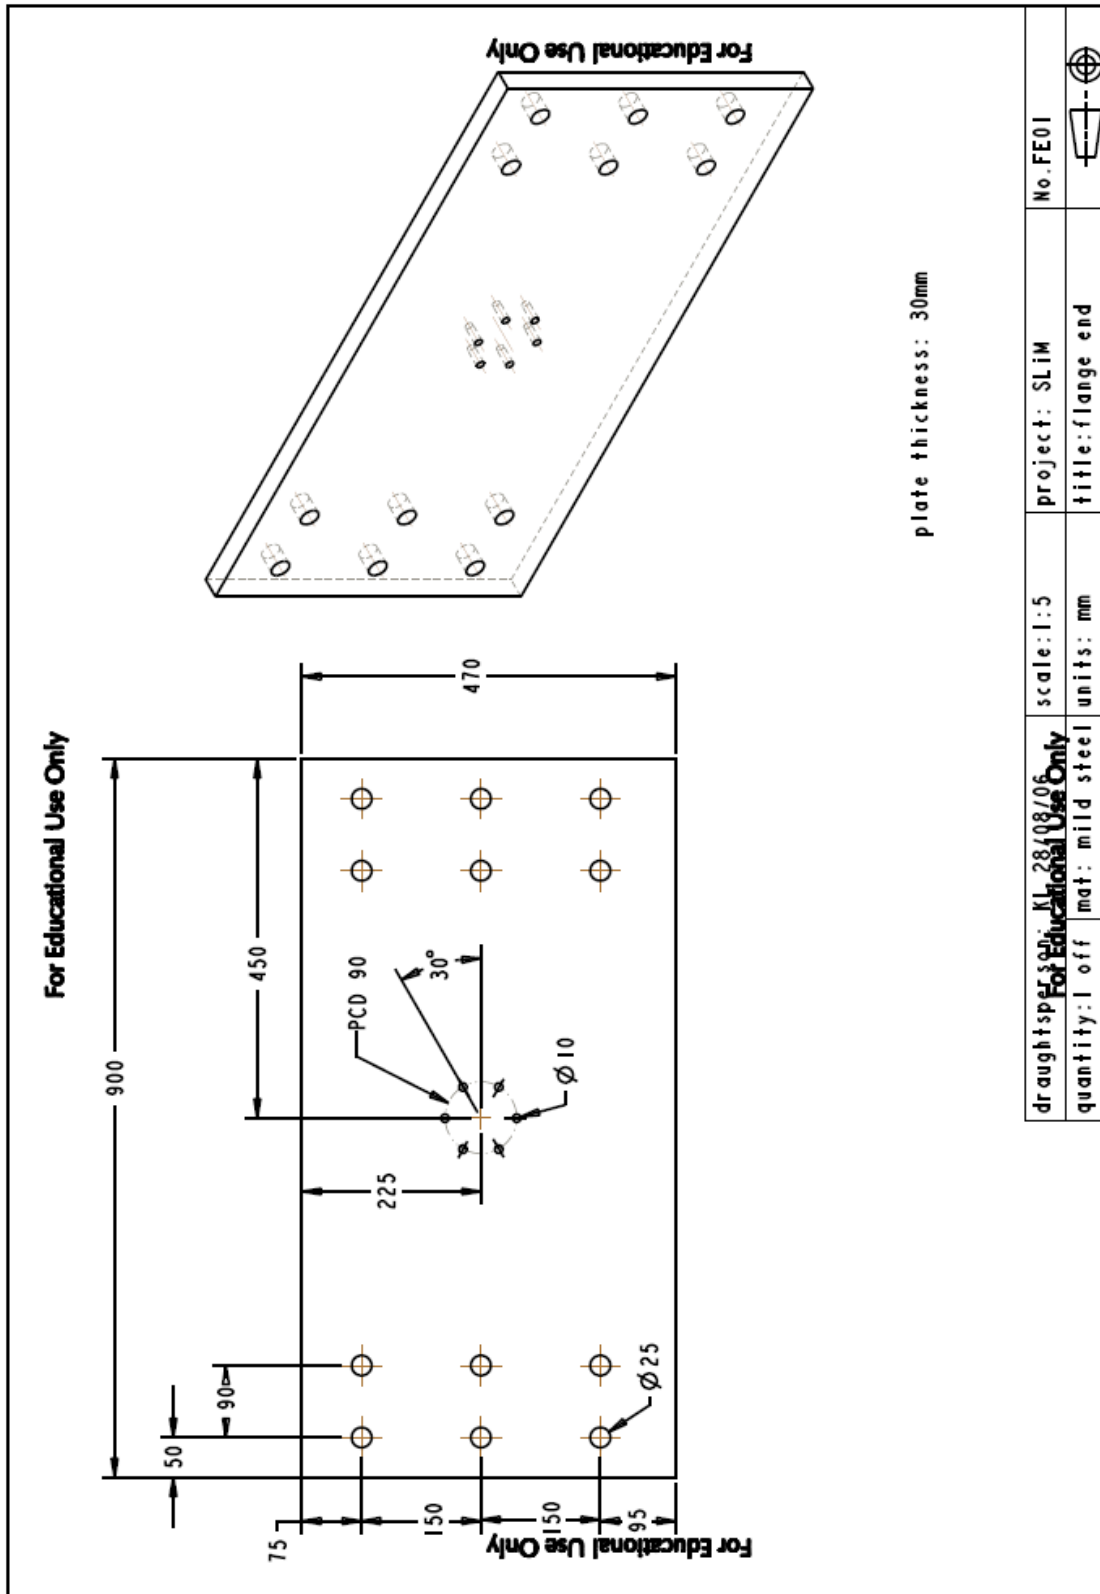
Working drawing – Flange 2 (end plate).
